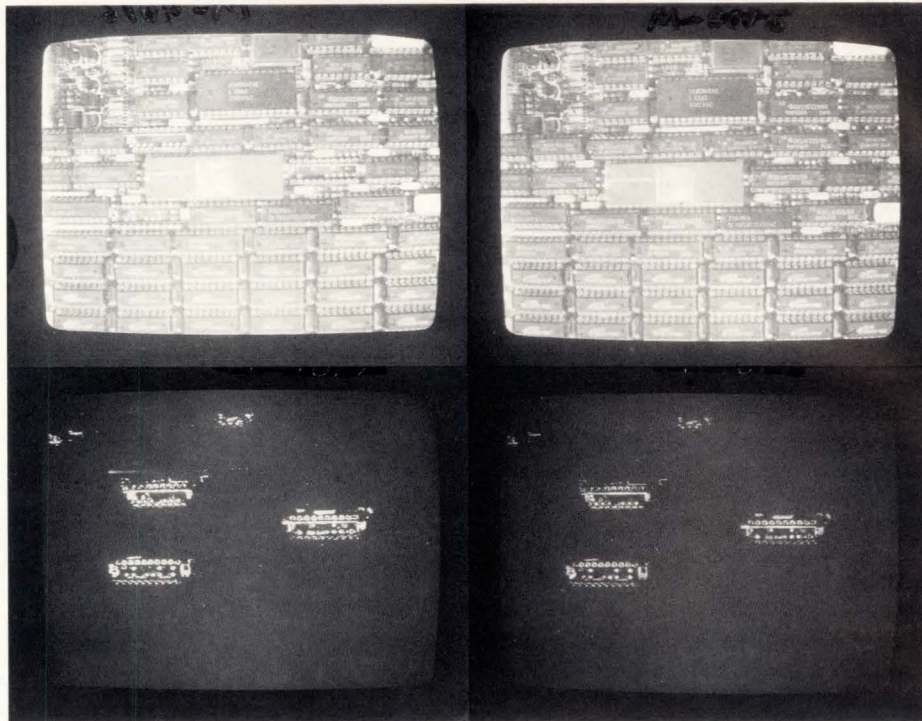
Using image processing for PCB inspection involves first scanning the board (a), then subtracting its template image (b) from it; missing chips are then identified (c) and highlighted (d).
